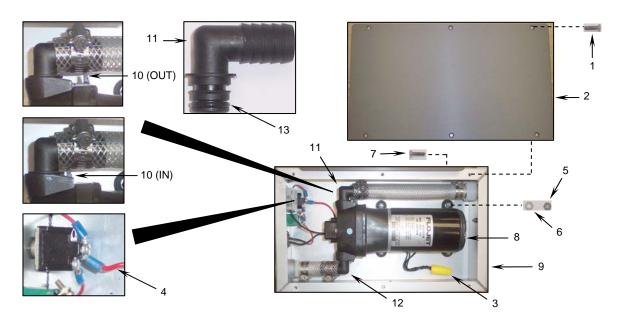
Removing the Sink Fill Pump Assembly Water Pump.
